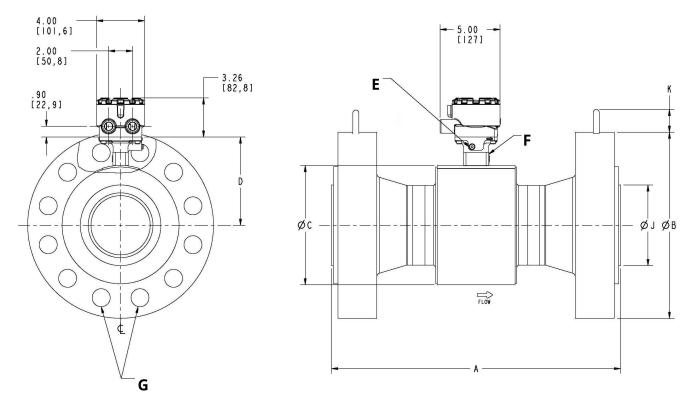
8705-M Flanged Sensor 1 in. to 24 in. (DN 25 mm to 600 mm) weld neck flange—(P ≤ Class 2500)
